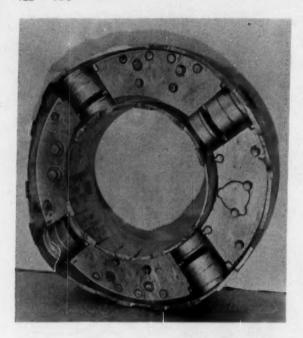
Drag half of casting with stiffeners on the 0.16 in. web section from the outer ring to the inner diameter ring which act as additional gating to feed the 0.16 in. web areas that are integral parts of the casting.
